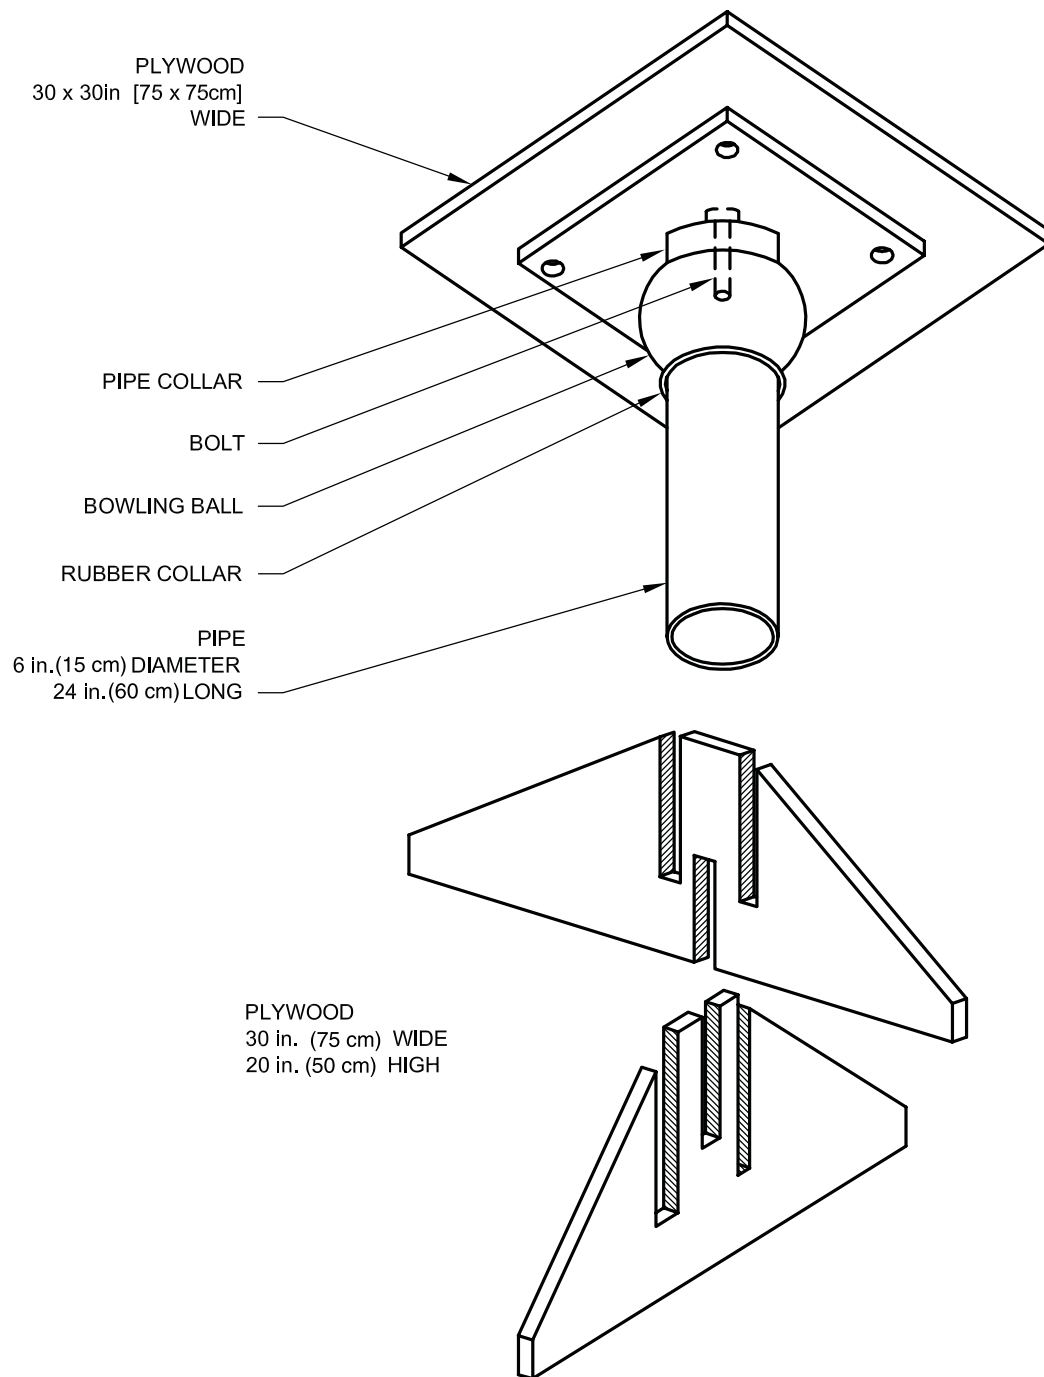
An exploded view of the construction of a bowling ball heliodon is shown.
